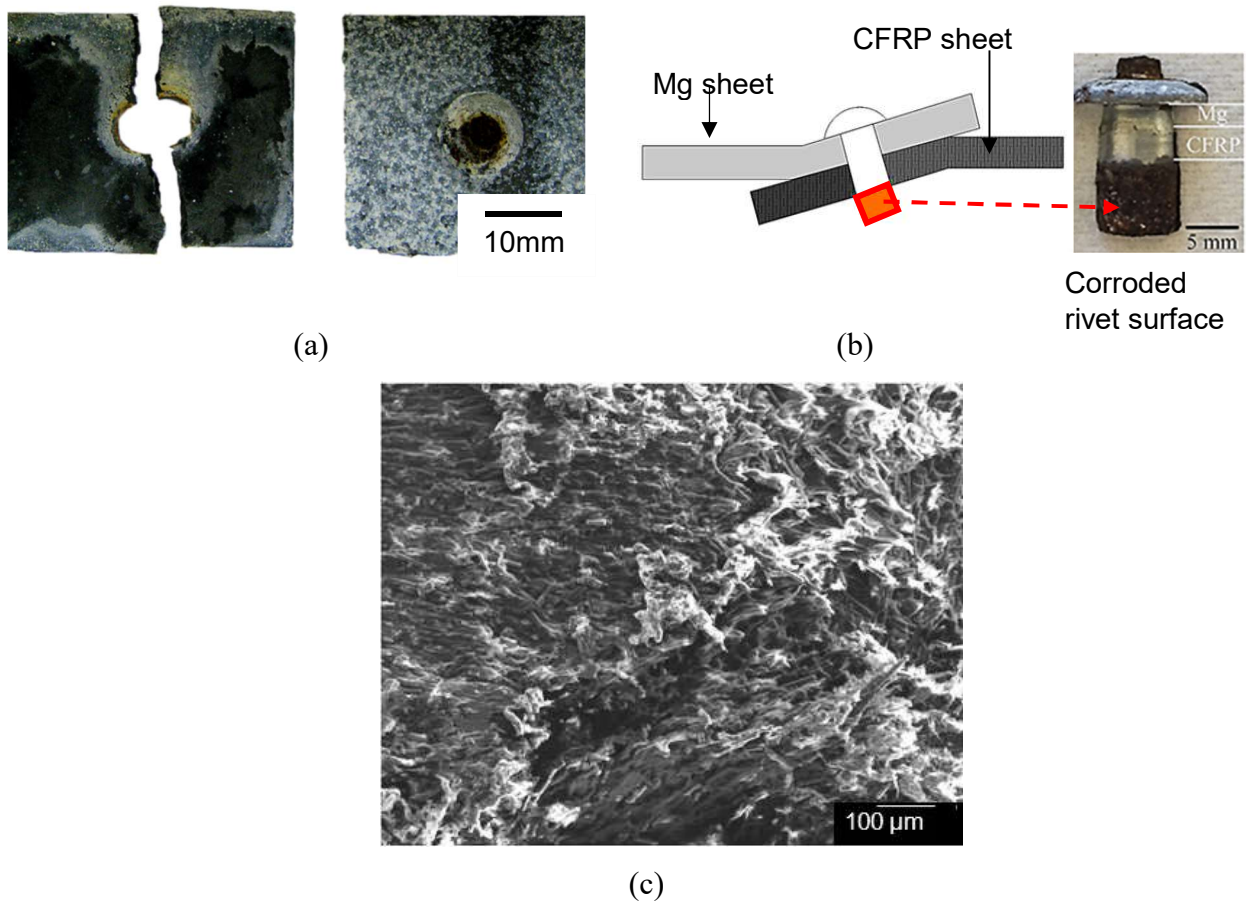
(a) Image of a fractured Mg/CFRP joint in tension failure mode (CFRP fractured), where the white particles are the corrosion products from Mg, (b) rusty surface (highlighted by orange box) that prevents rivet pull out failure, and (c) fractured surface of exposed CFRP sheet where fractured fiber and fiber free of nylon (debonding) is visible
